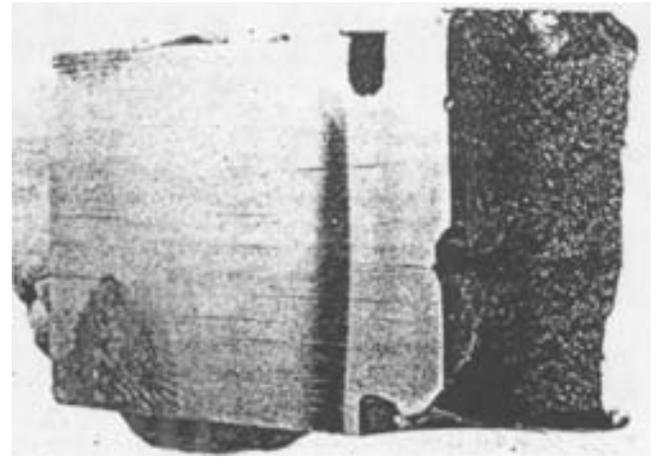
Fracture surface of flash butt weld. Surface flat spot follows line of dark-etching band. X2
